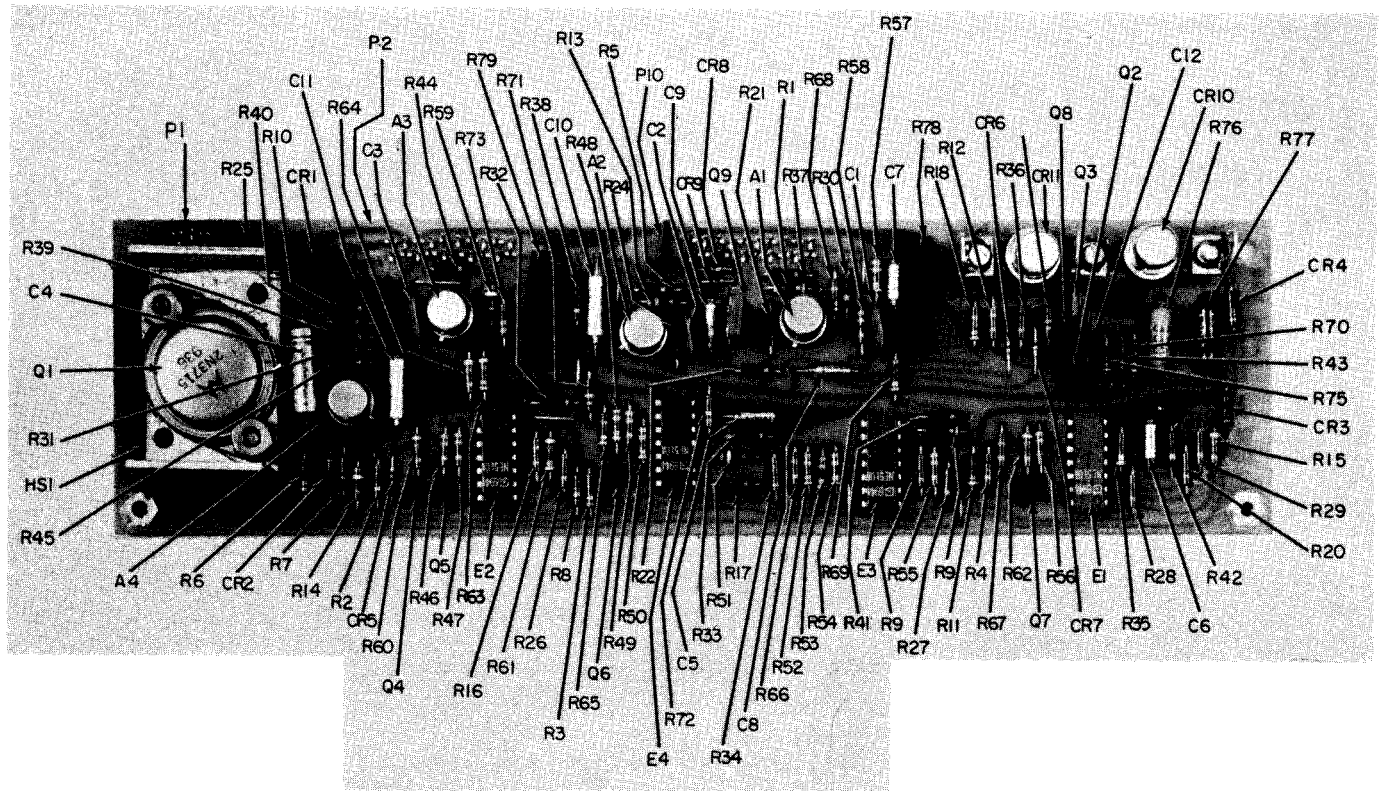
POWER SUPPLY REGULATOR ASSEMBLY
